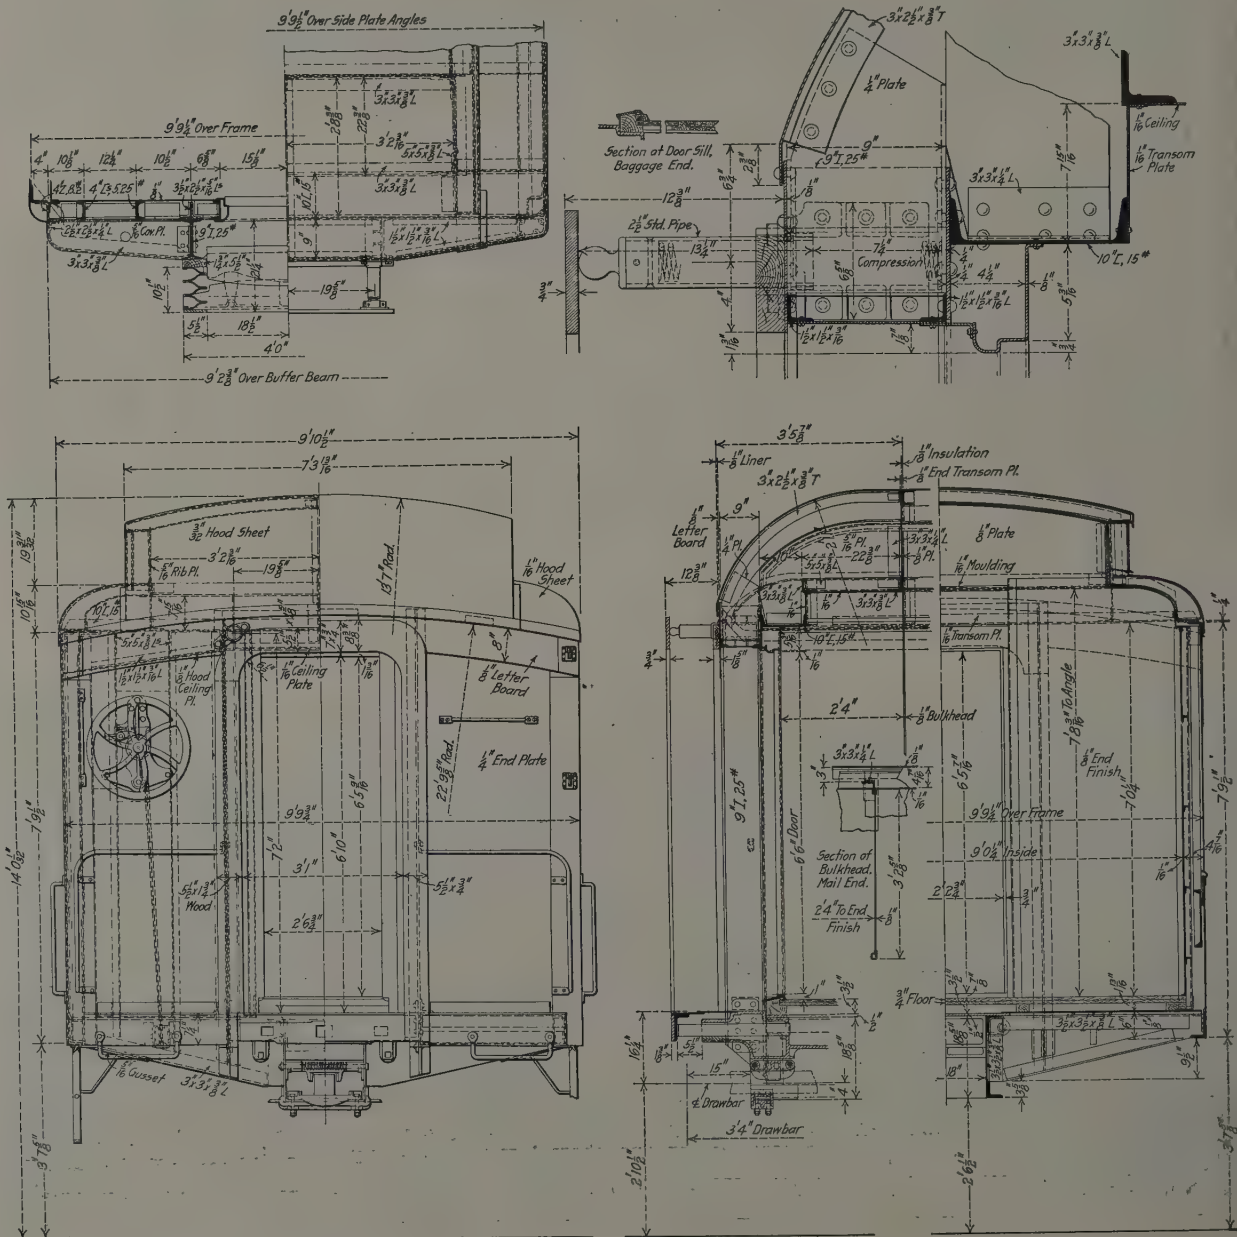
End Construction of Central Railroad of New Jersey Steel Baggage and Postal Car.
